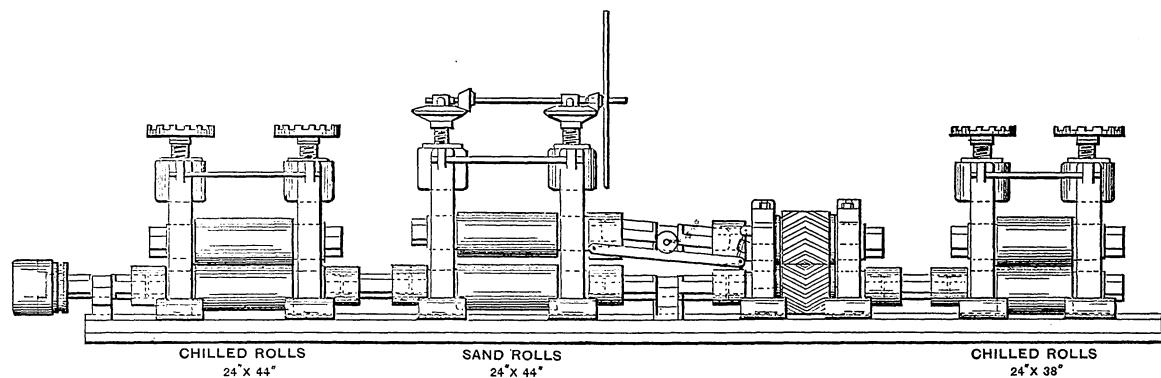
Elevation of Modern American Light Sheet Mill, 24-Inch Rolls.—Weight of Housings, 23,000 Pounds.—Booth Design.
